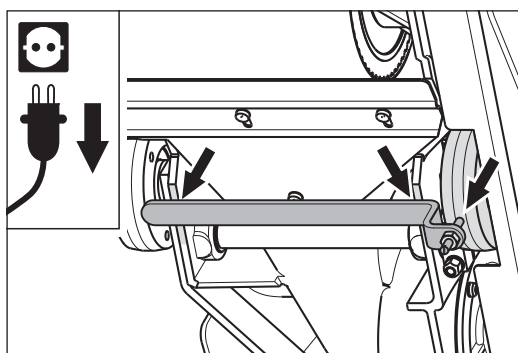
Remove the current setting fixture from the right-hand wheel (seen from below).
